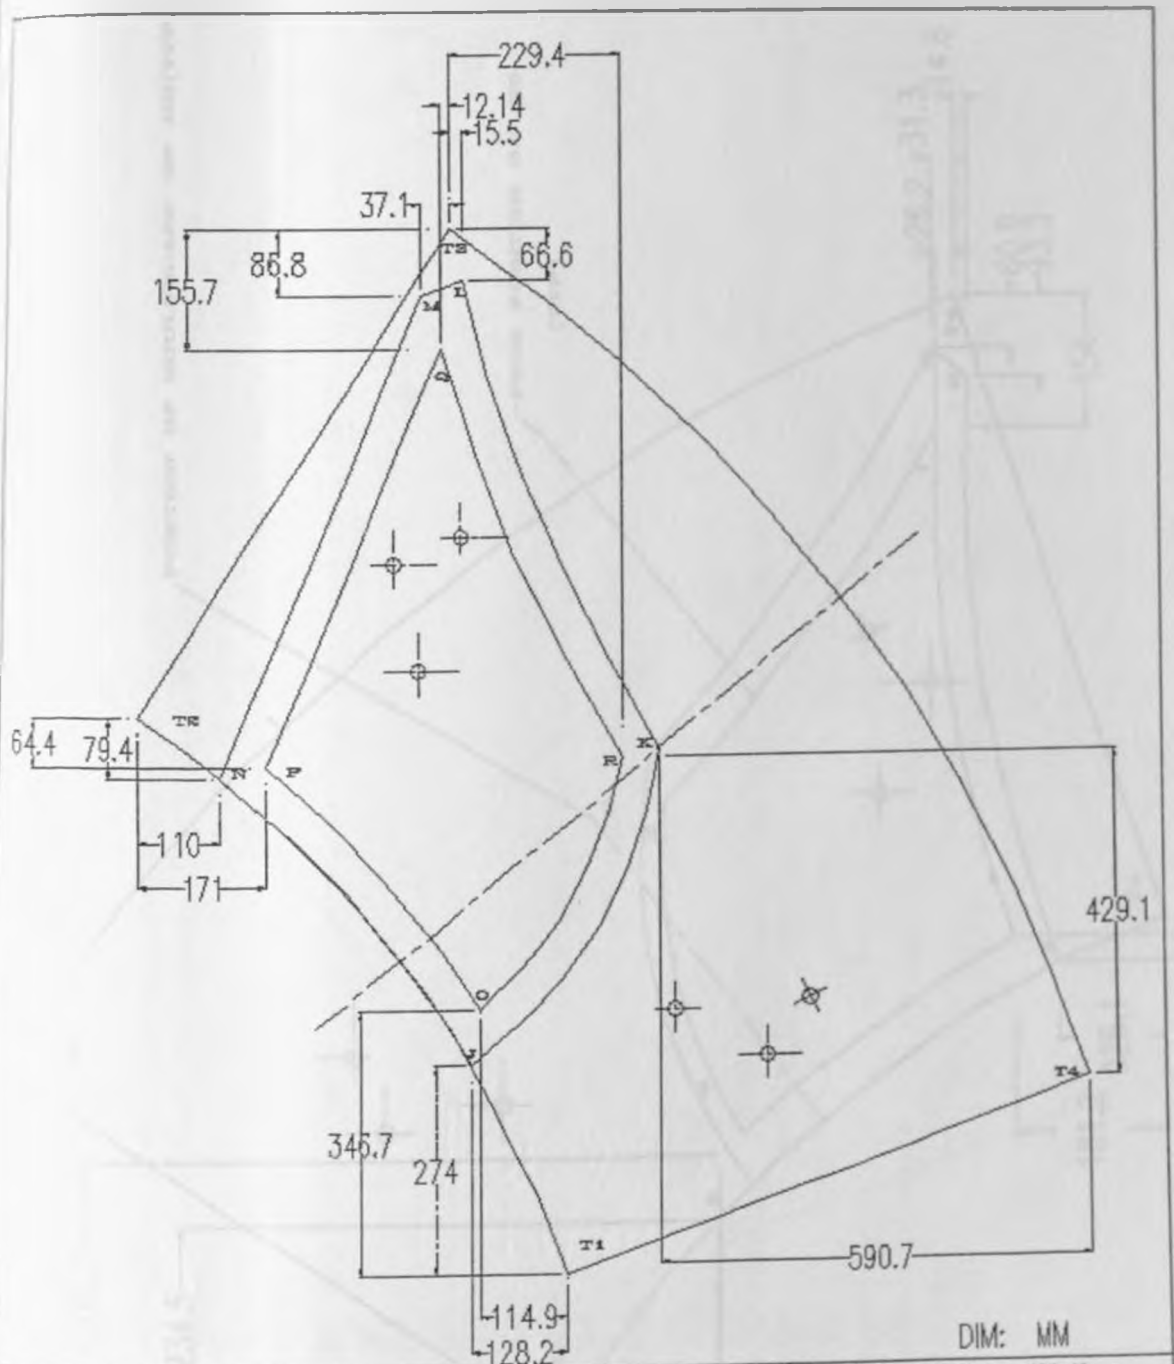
A: Furrower Jig Plate showing Marks of the Mouldboard and Frog Before Filleting
